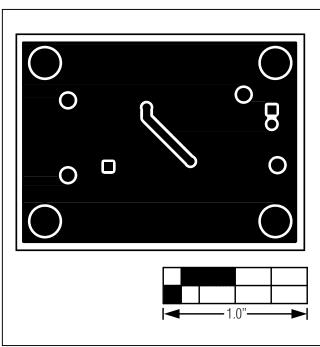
MAX9613 EV Kit PCB Layout—Solder Side>
